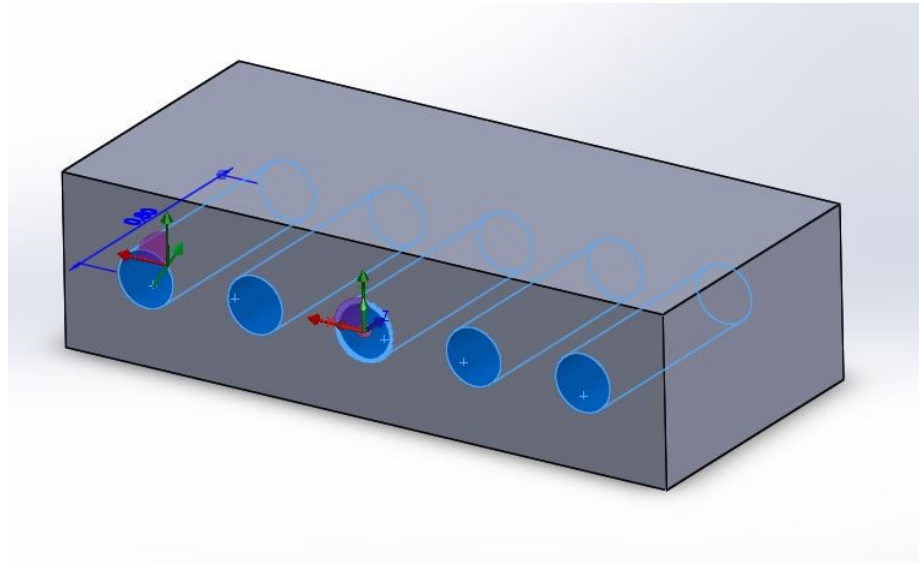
The First Design that has the Smallest Dimensions that can be Achieved by the 3D Printer [27]
